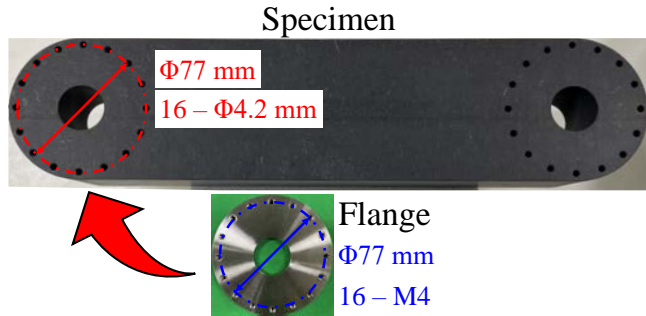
Appearance and dimensions of the specimen and the flange. On both ends of the 45 mm thick specimen, there are 16 equally spaced 4.2 mm diameter through-holes. On the other hand, the flange has 16 equally spaced M4 female threads.
